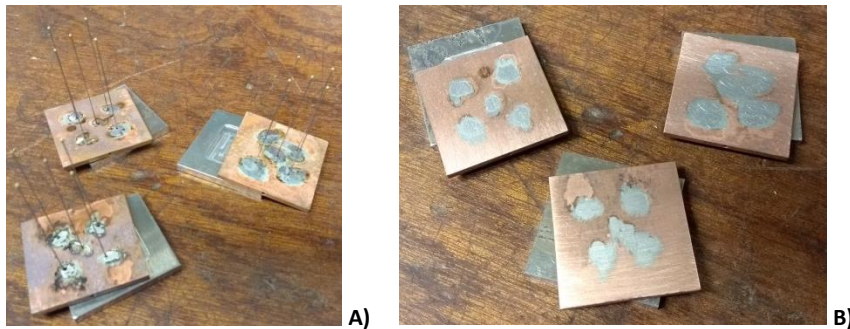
Assembly of the second prototype with A) the soldered needles, and B) the sanded back side.
